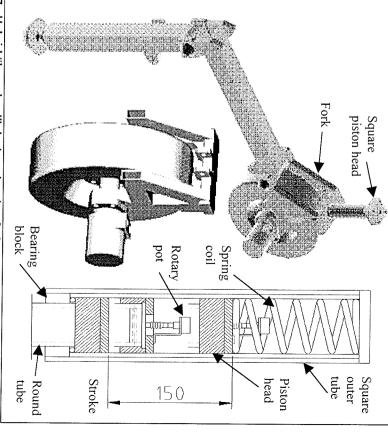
Hybrid "leg-wheel" design showing fork, motor and suspension
